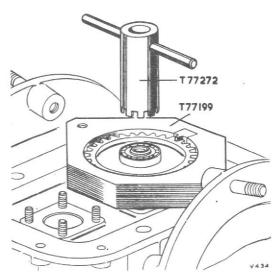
Tightening the ring nut, using locking fixture T77199 to hold the bottom drive gear of the generator vertical shaft
